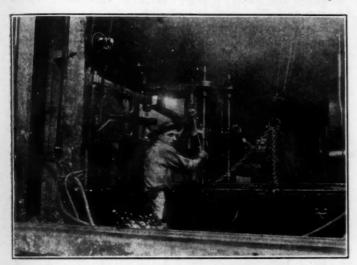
Frame-Drilling Jig and Post Drilling-Machine
